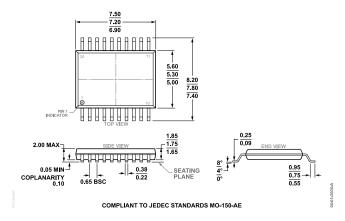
20-Lead Shrink Small Outline Package [SSOP] (RS-20) Dimensions shown in millimeters
